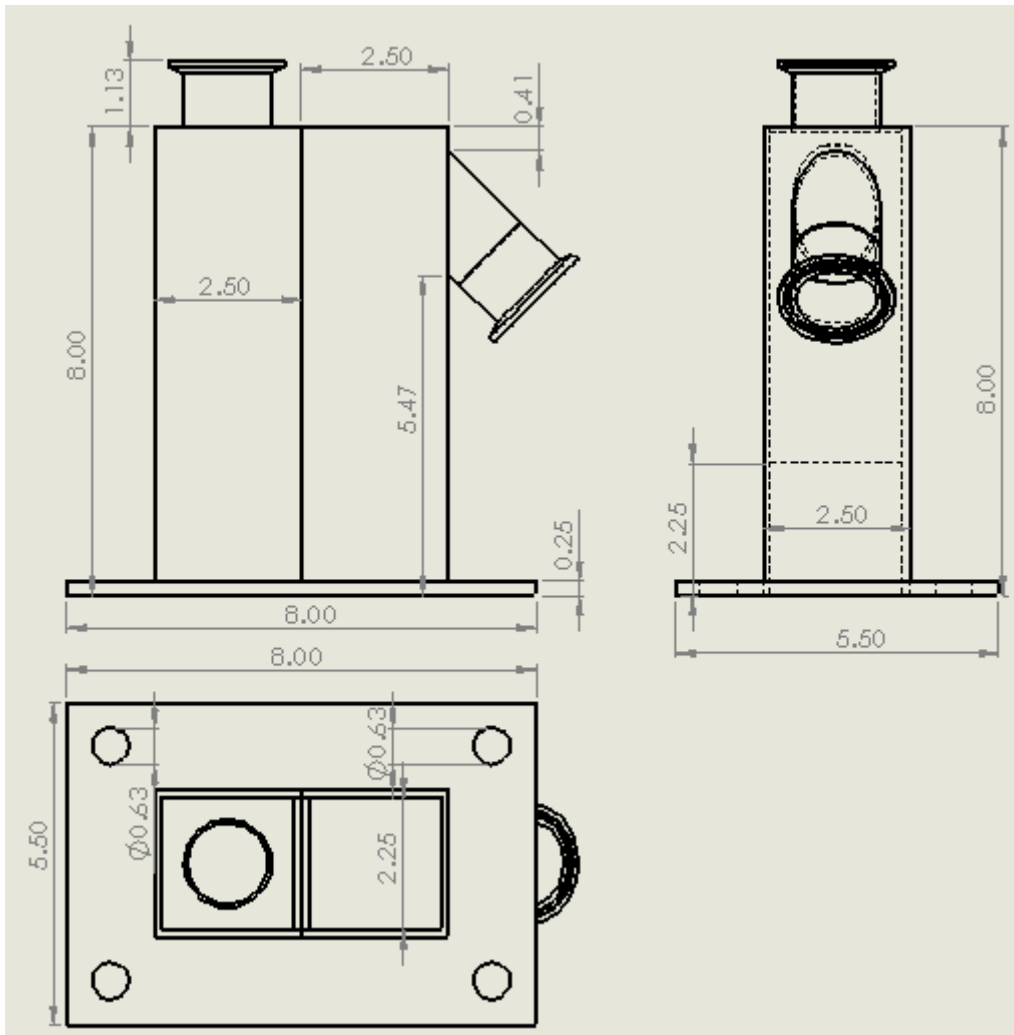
The loop seal design which consists of two square tubes welded together.
